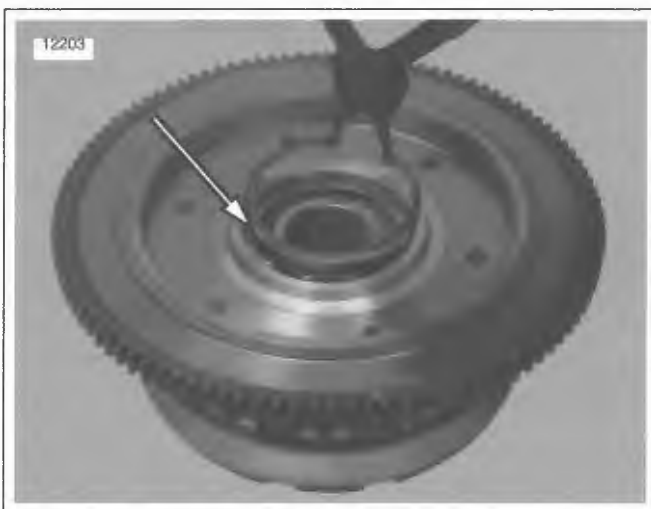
Install Clutch Shell Retaining Ring with Flat Side Against Bearing
